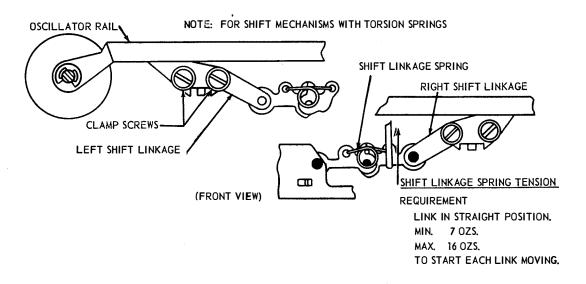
TYPING UNIT, SHIFT MECHANISM
